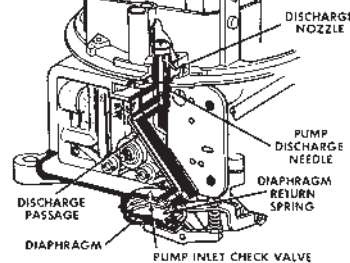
Accelerator Pump System with Plastic Inlet Check Valve.
